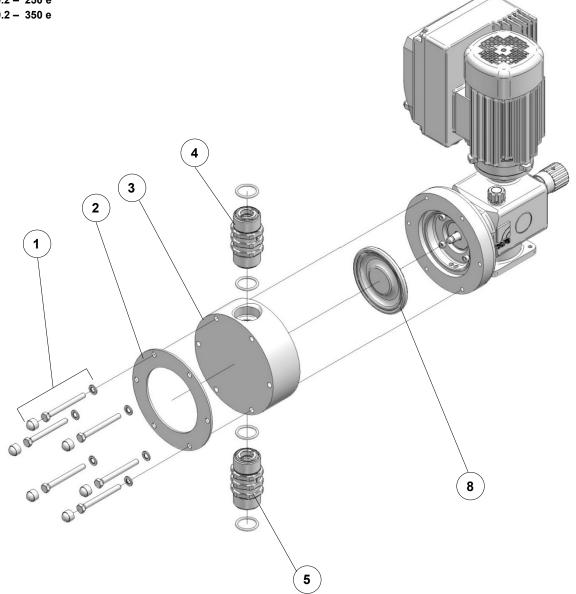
Spare- and wearing parts (C 409.2-250 e ...-350 e)
